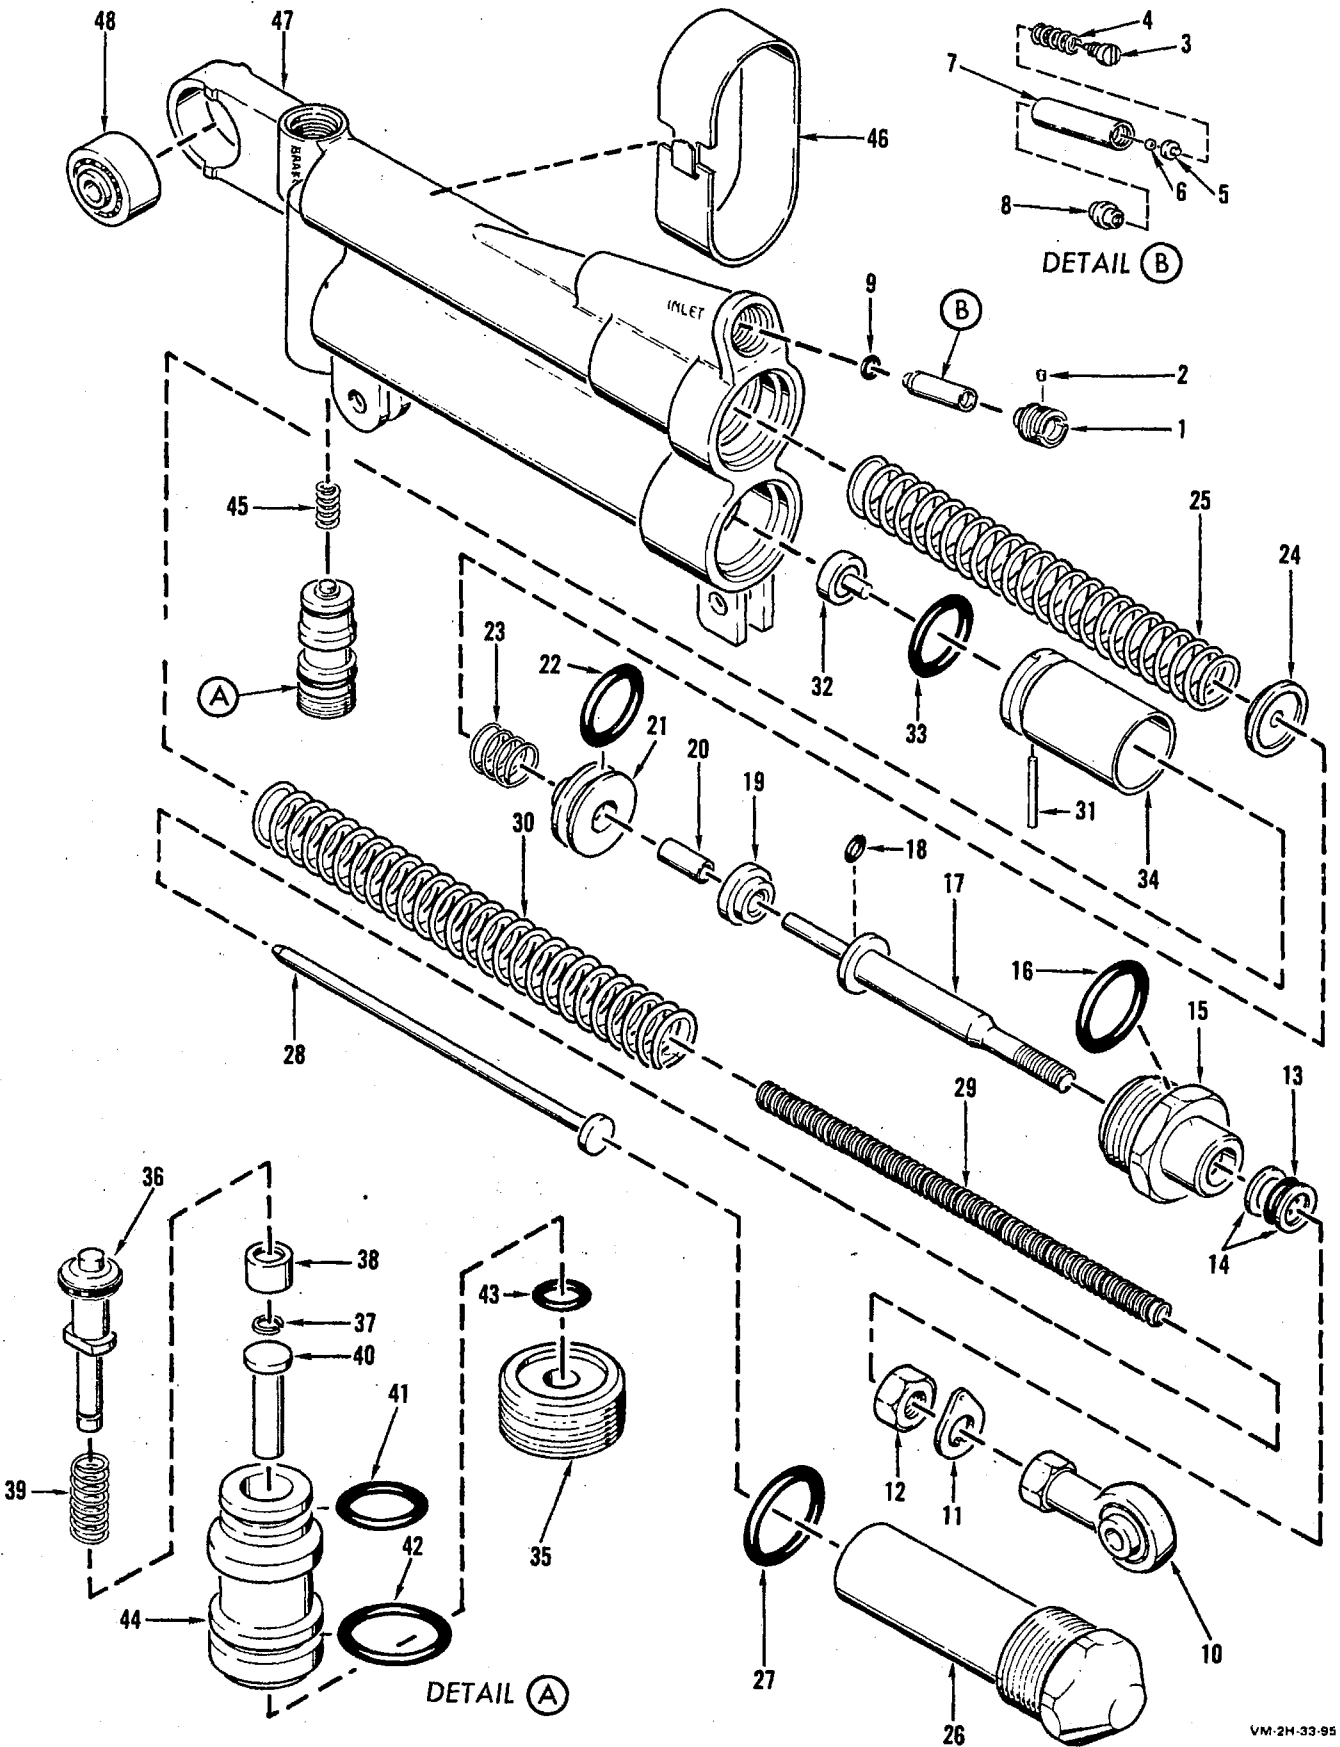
Hydraulic Park Brake Compensator and Wheel Brake Master Cylinder (Sheet 1 of 2)
